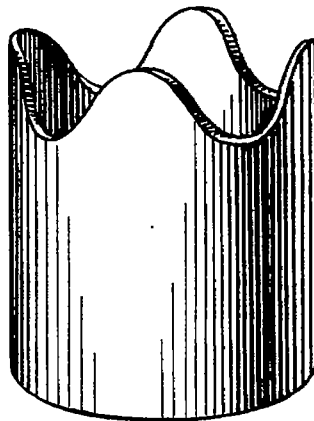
Deep drawing of a circular blank into a cylindrical cup.
